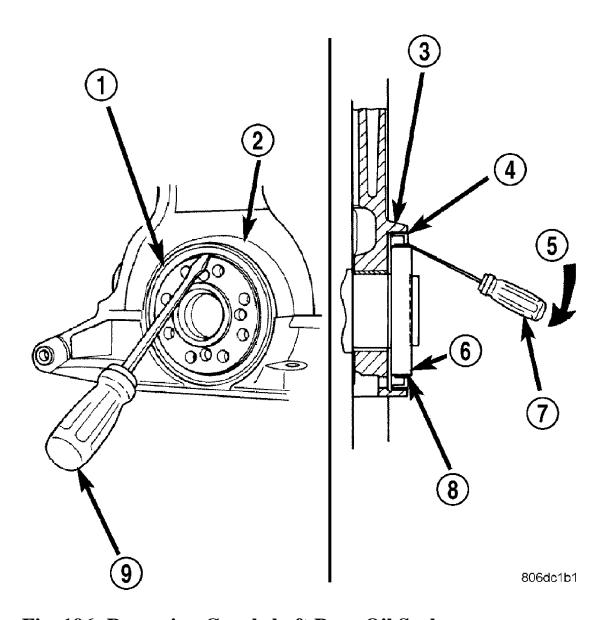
Removing Crankshaft Rear Oil Seal Courtesy of CHRYSLER LLC
